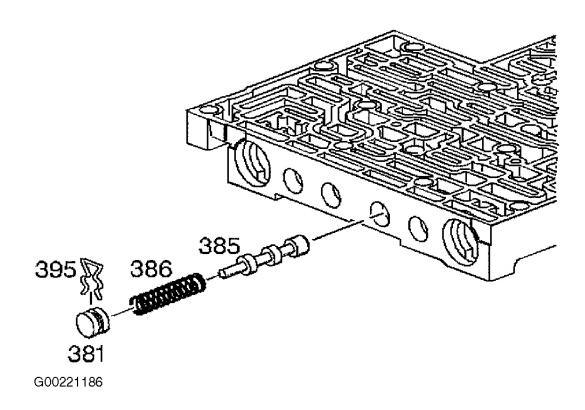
Removing/Installing 3-4 Shift Valve Assembly Courtesy of GENERAL MOTORS CORP.
